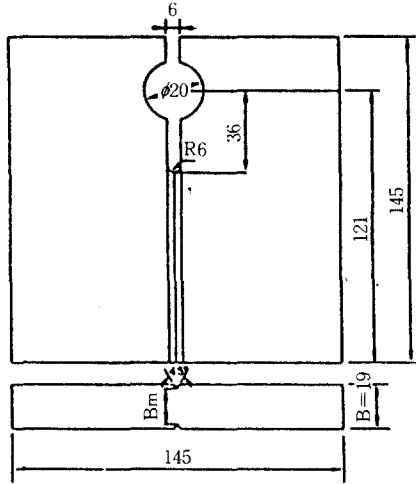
Dimensions of CLWL specimen(Unit : mm)
